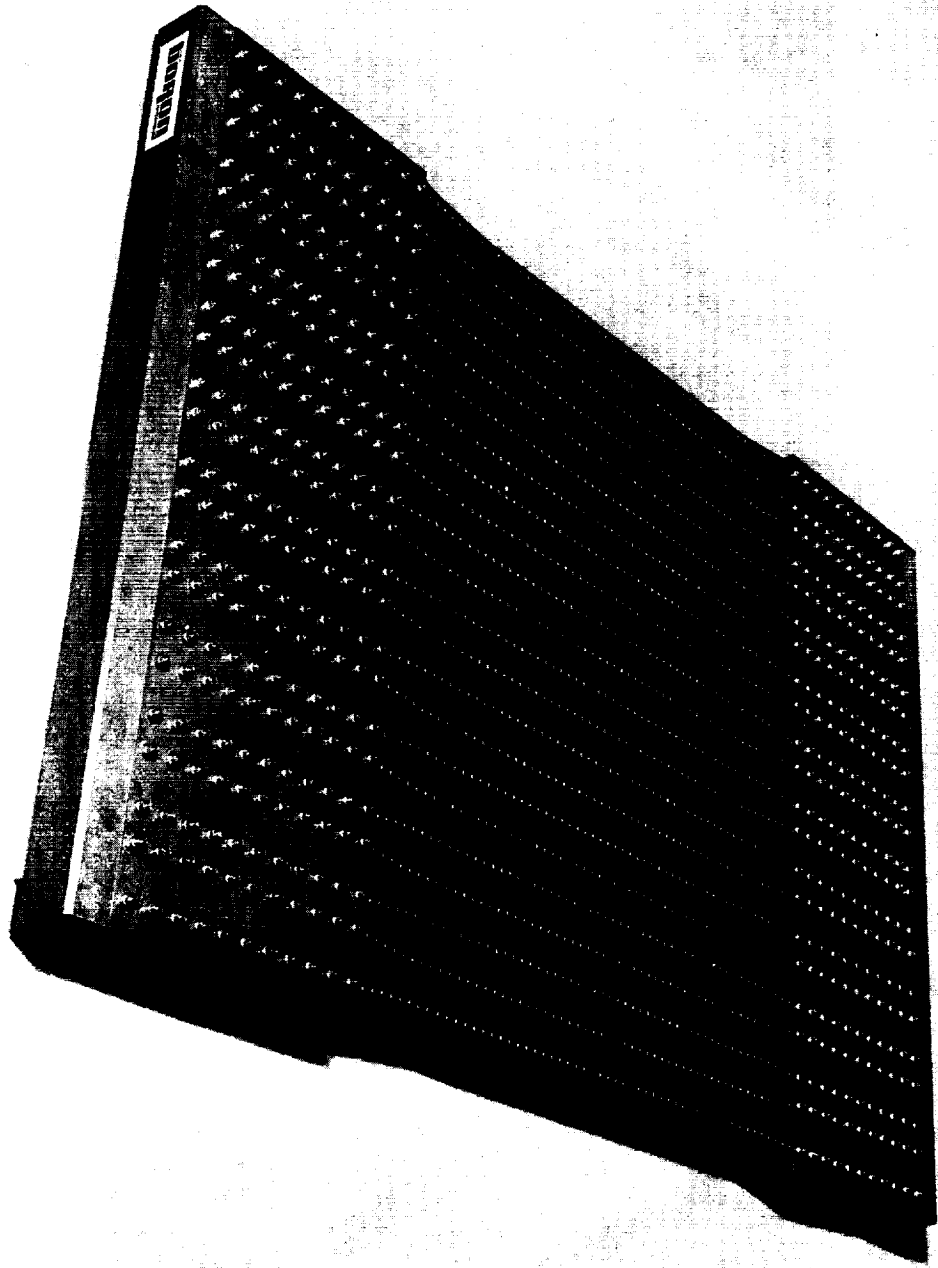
COMPLETED PANEL SHOWING SKIN SURFACE
